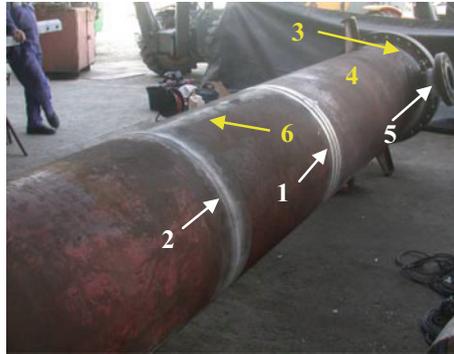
General view of the heat exchanger and the locations of replicas examination: 1, 2—periphery welds; 3—fasten; 4—shell surface; 5—flange; 6—longitudinal weld
